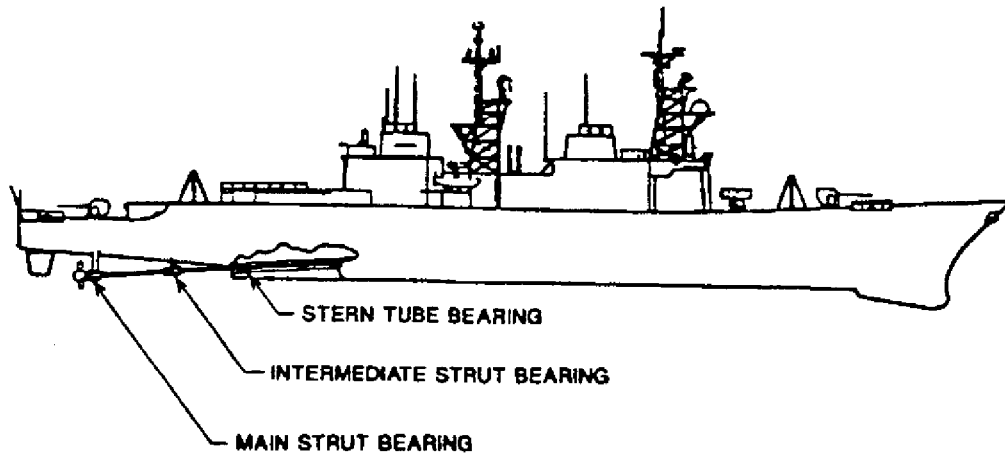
Stern Tube and Strut Bearing Locations
